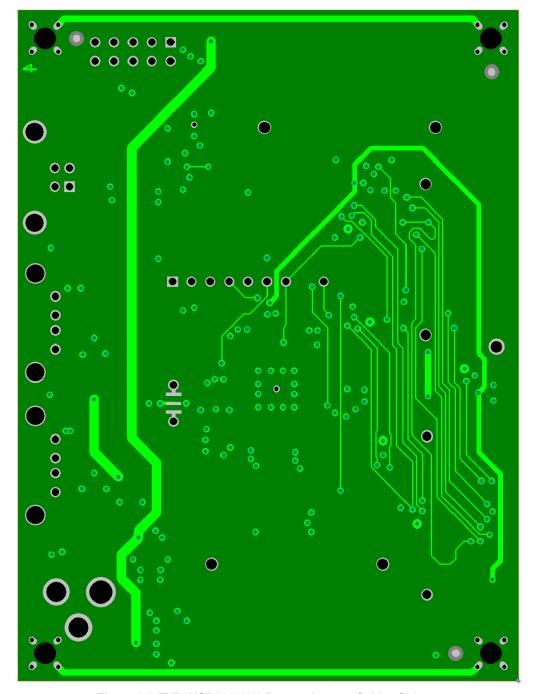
EVB_USB2660/60i Bottom Layer - Solder Side
